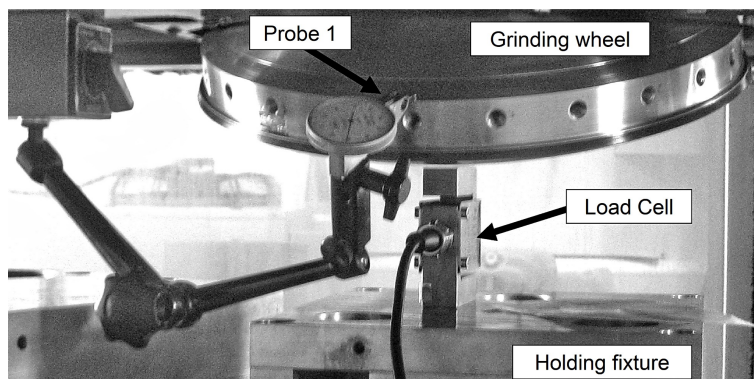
Grinding stiffness test set up - BoX grinding machine
